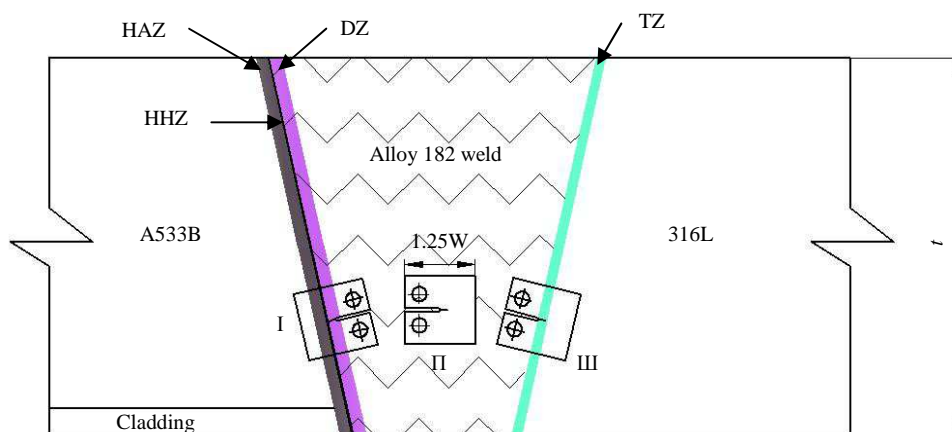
Schematic diagram of the sampling position in an Alloy 182-A533B LAS dissimilar weld joint (where I -FB specimen, II-WM specimen, III-TZ specimen)
